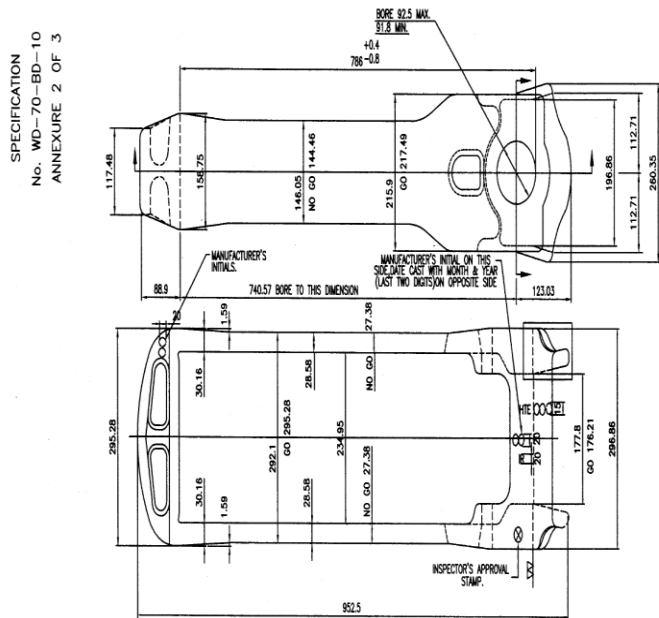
2D drawing of knuckle joint (ref- CBC Spec No. WD-70-BD-10 (Rev.1)
